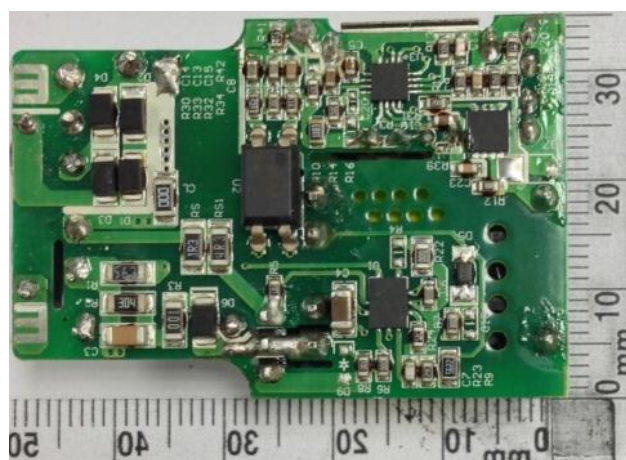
Bottom View (Dimension 45 x 32 [mm²])
